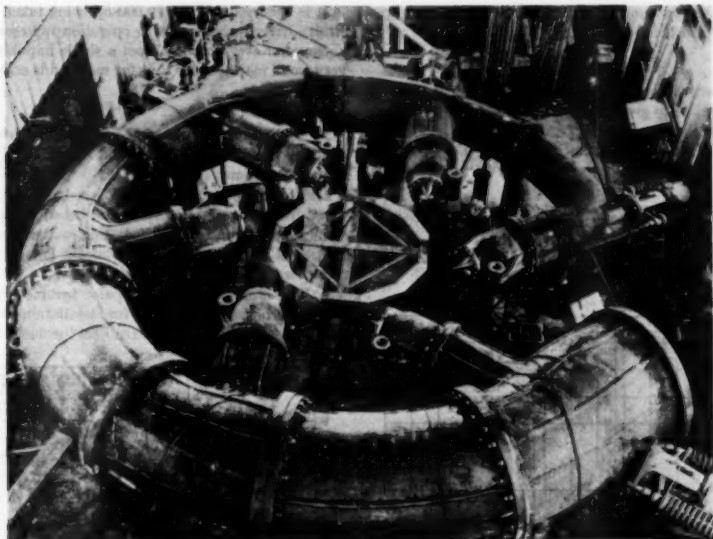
SHOP ASSEMBLY OF TURBINE CASING AND NEEDLE NOZZLES
